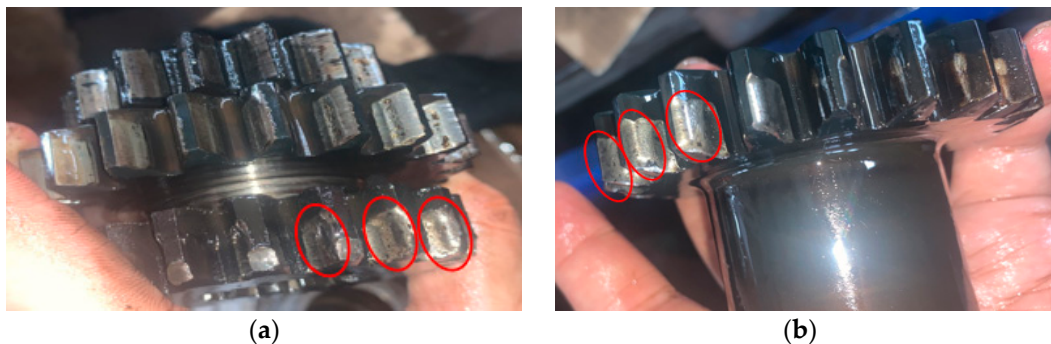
Damage of second drive gear (a) and second driven gear (b) inside the gearbox.
